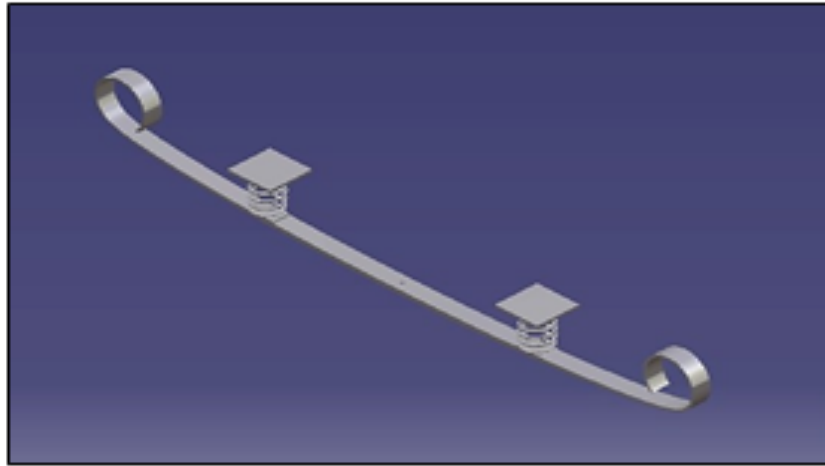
Proposed Leaf Spring Model with Combination of Helical Springs.
